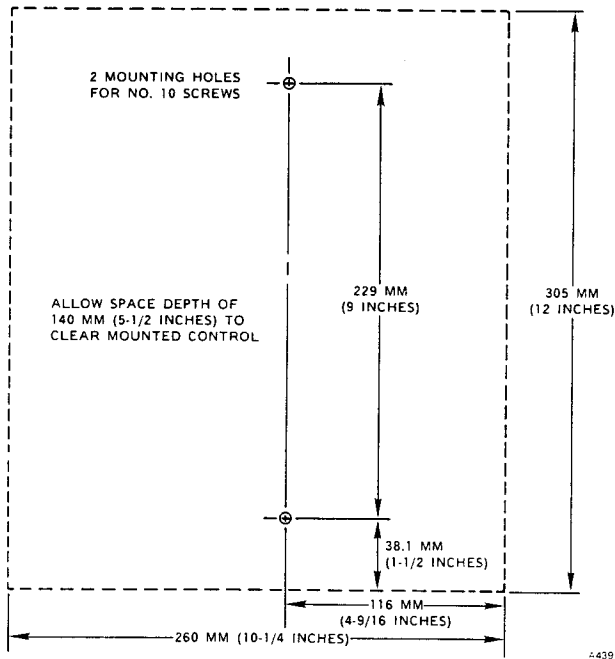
Space and Mounting Layout for 9001-01 Controller (Provides Approximately 1/4 inch Clearance, 3 sides, and 1-3/8 inch Wiring Clearance, Left Side)
